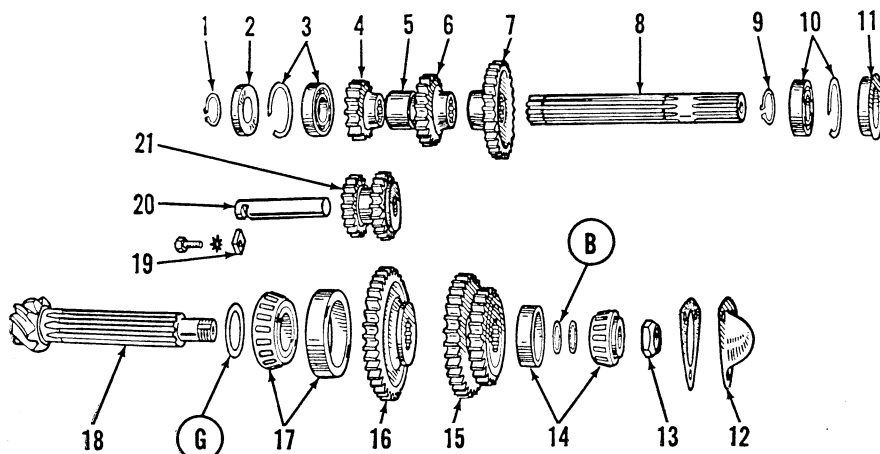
Pony transmission assembly. Shims (B) are for bevel pinion shaft bearing adjustment. Shims (G) are for mesh adjustment of main drive bevel gears.
